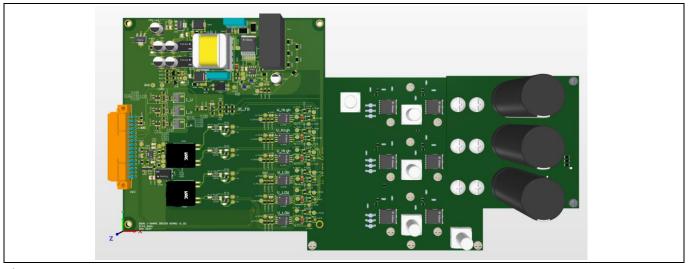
EVAL\_10KW\_B6\_SIC400V assembly
